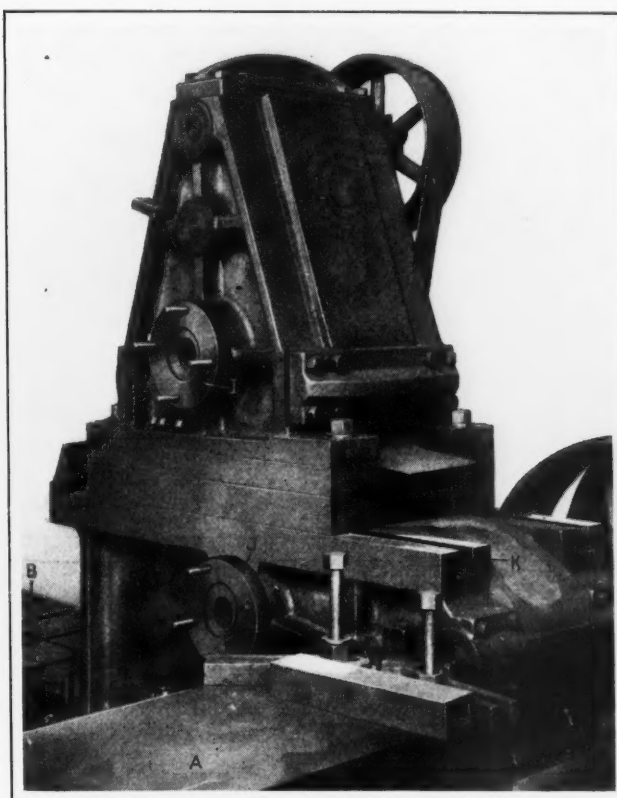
Headstock which Drives Boring-bars Shown in Tailstock in Fig. 1
